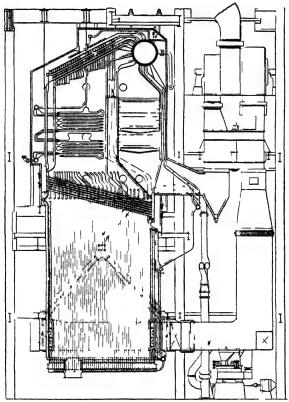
a—One of two 500,000-lb per hour, 1400-lb pressure 900°F steam temperature Combustion Engineering Company sectional-header boilers installed at Waterside Station of New York Edison Company
